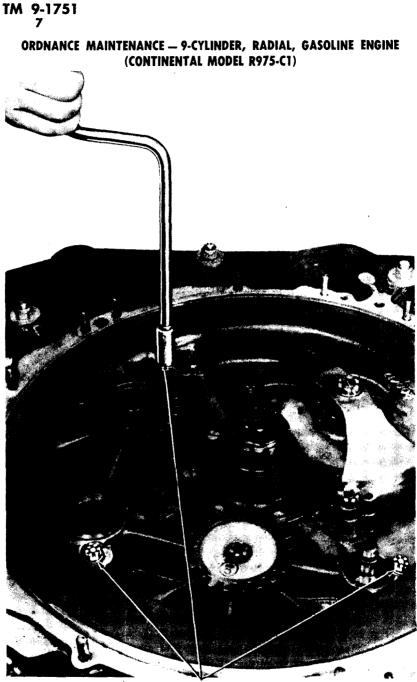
Removing Accessory Drive Gear Nut (Magneto Drive)
